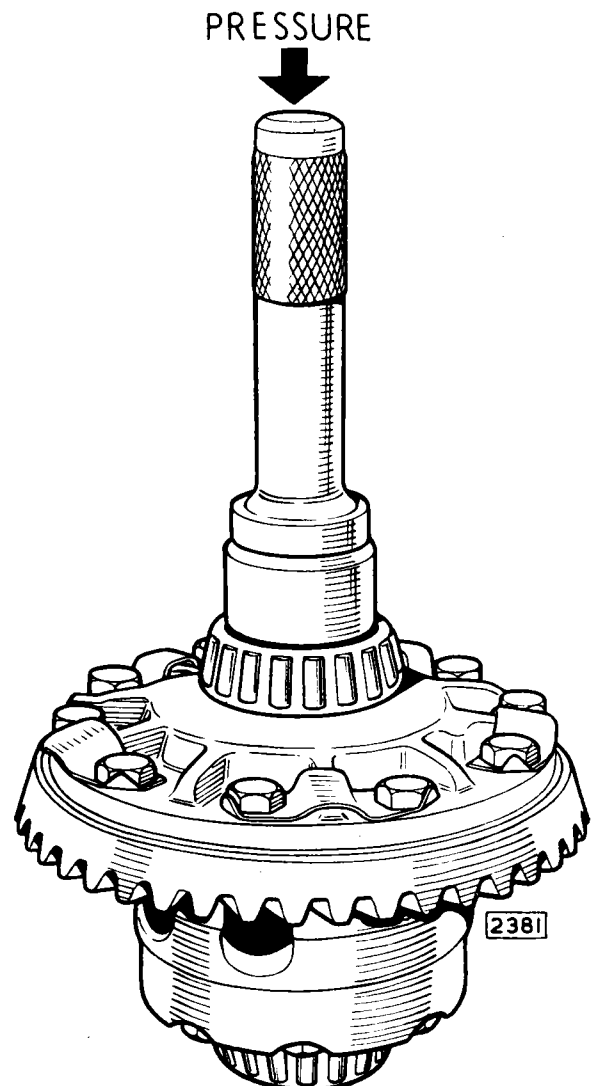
Replacing the differential bearing using Churchill Tool No. 550 with adaptor No. SL 550-1.
